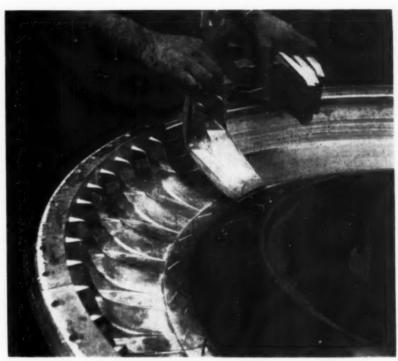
Assembling Inserts for a Heavy-Duty Truck Tire in a Steel Mold-Back. The segments are bolted down with countersunk studs around the parting surface. (Photo courtesy Akron Beacon Journal)
